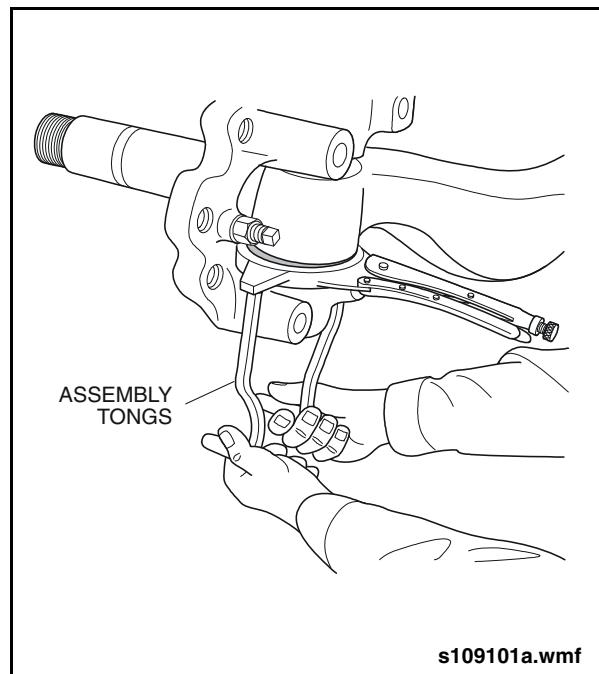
Thrust Bearing Sleeve Positioning Tool
